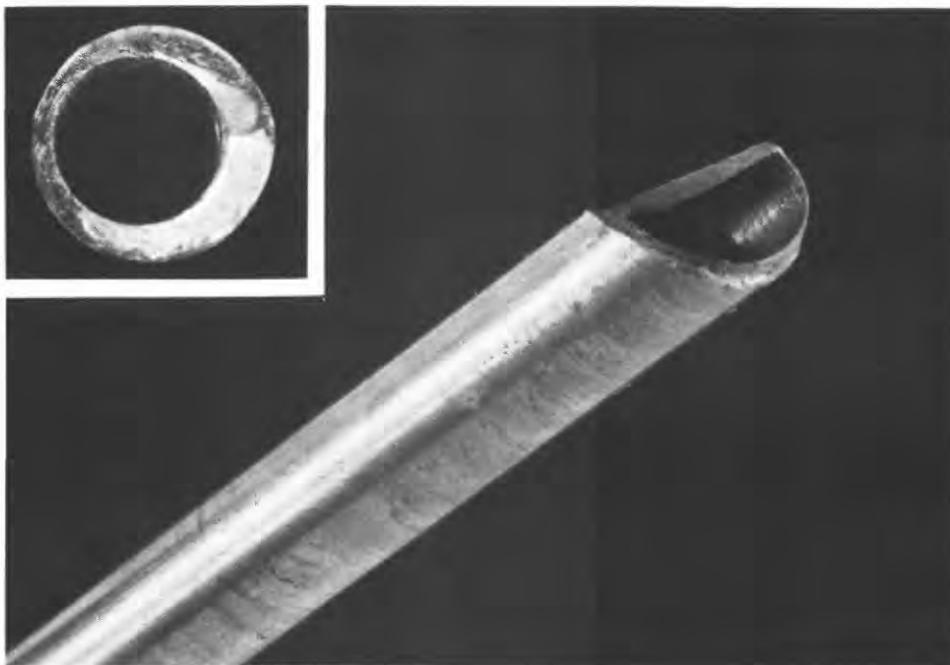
Broken bit in which hole is off center. Inset shows end view.
